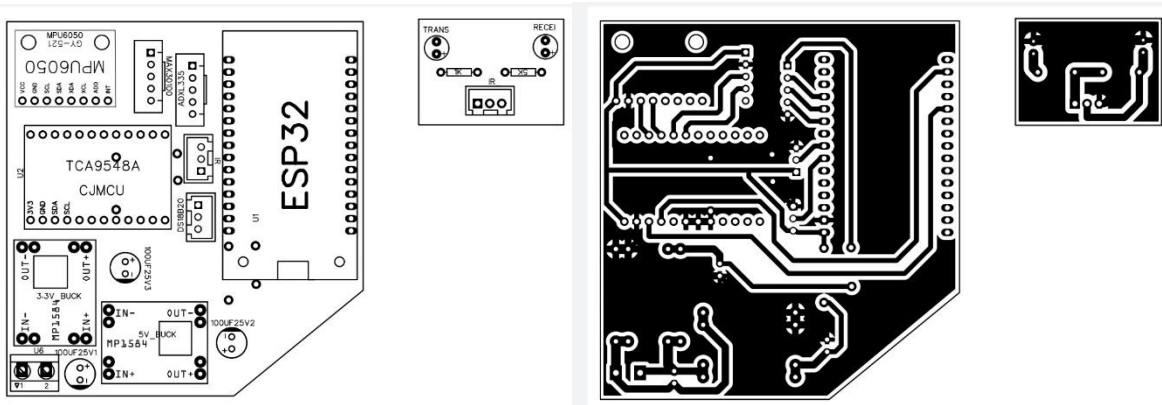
PCB layout schematic (on the left the main board on the right the NIR sensor)
